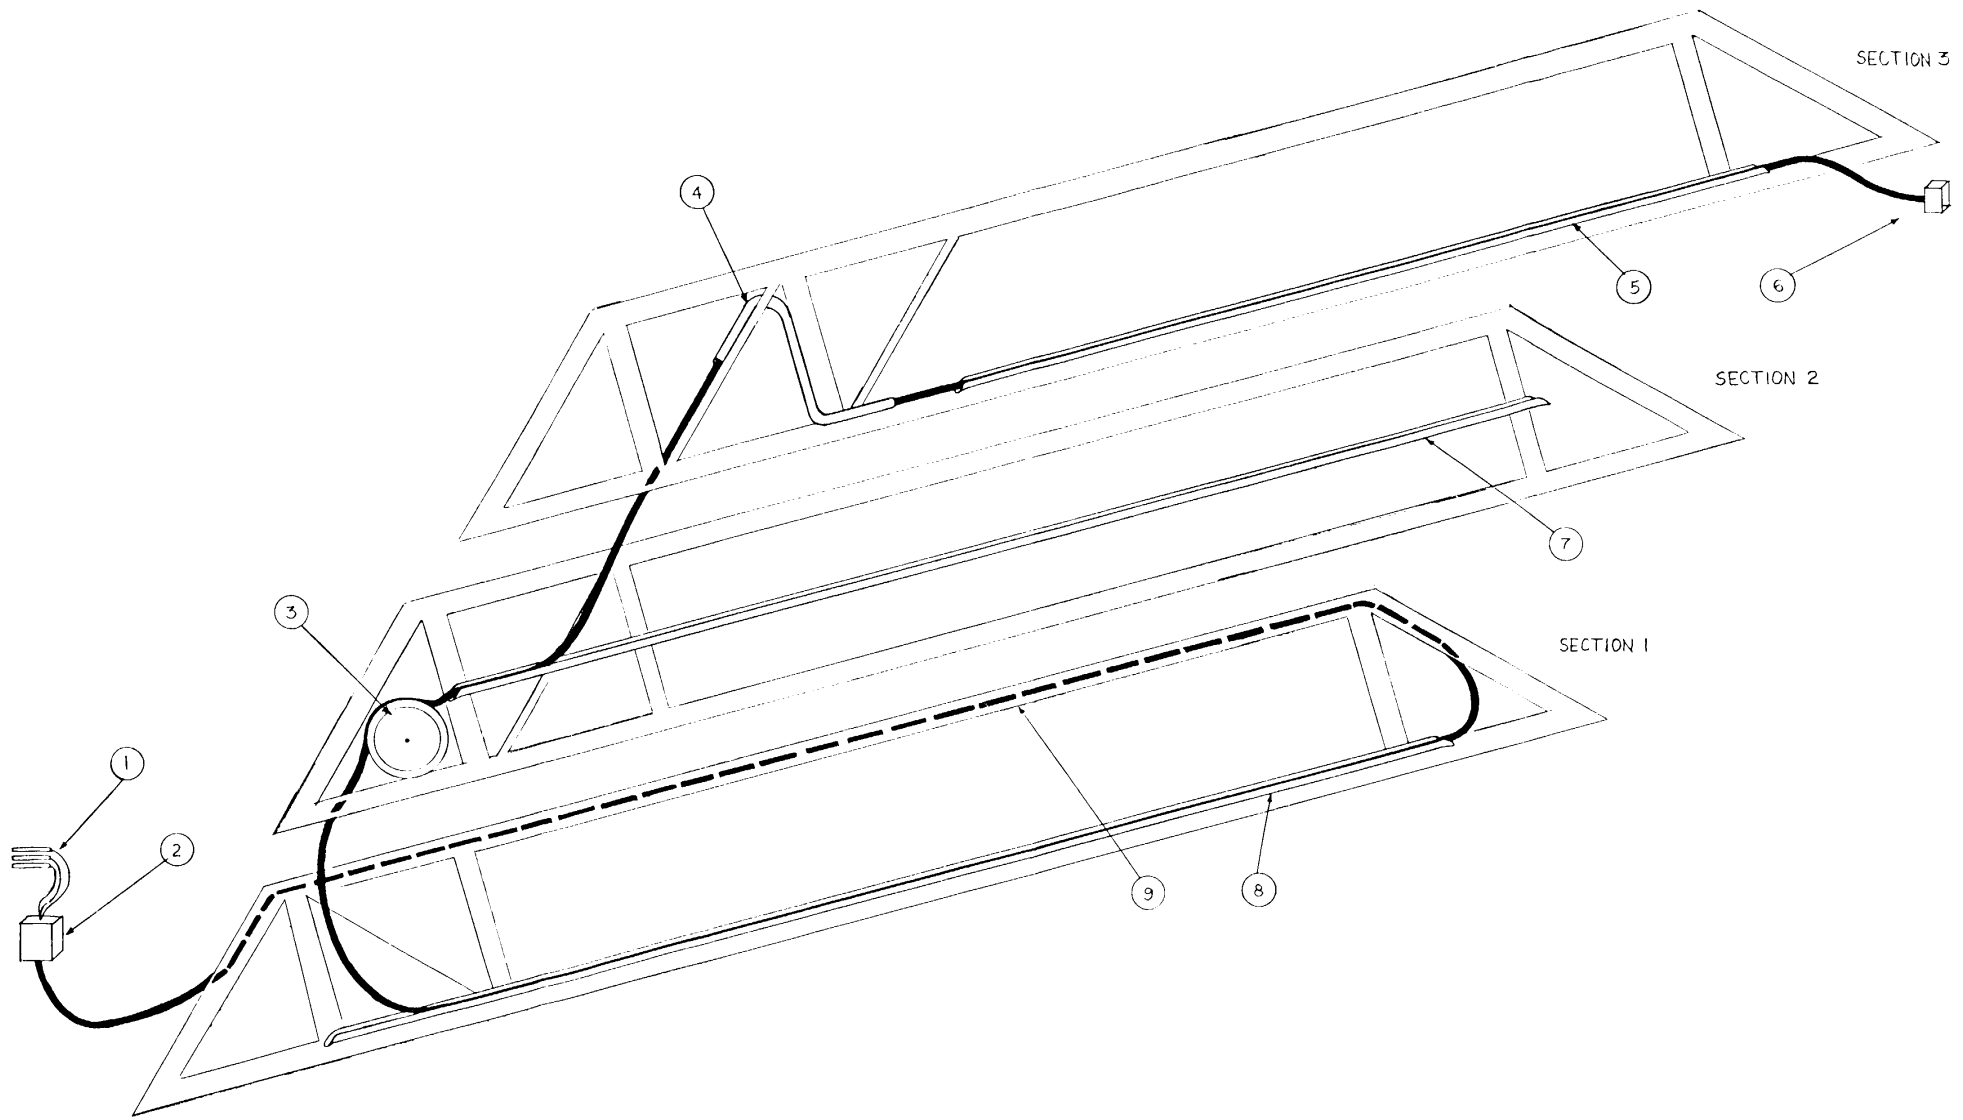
110 VAC Cable Layout Ladder Retracted
